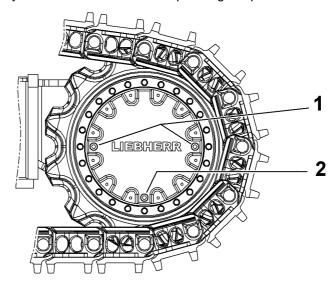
Travel gear - Oil level plugs 1 and oil drain plug 2
